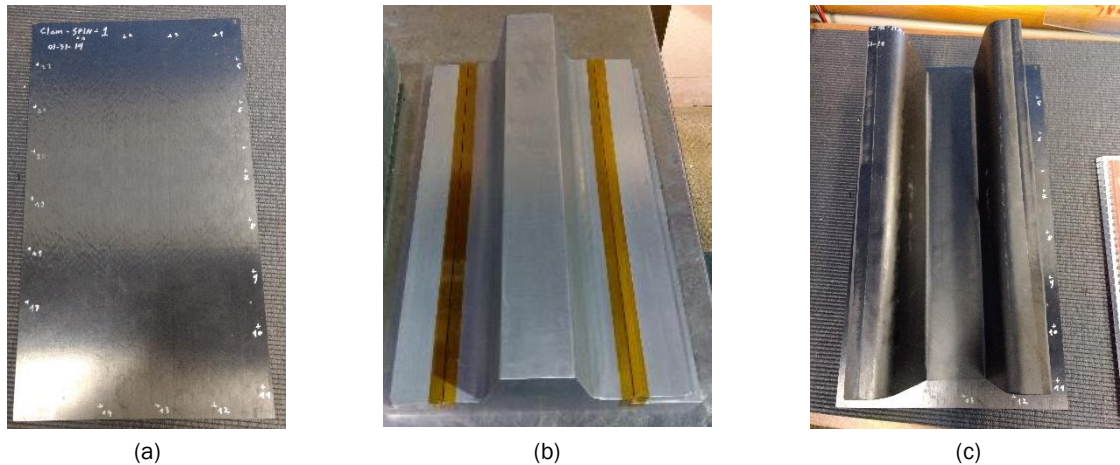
(a) Fabricated spine; (b) hat geometry tool; and (c) finished hat section. Source: University of Delaware.
